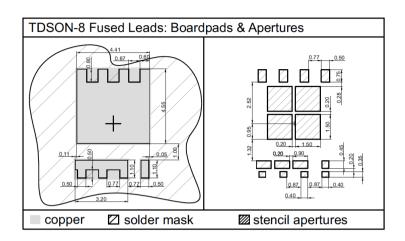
Footprint drawing PG-TDSON-8, dimensions in mm
